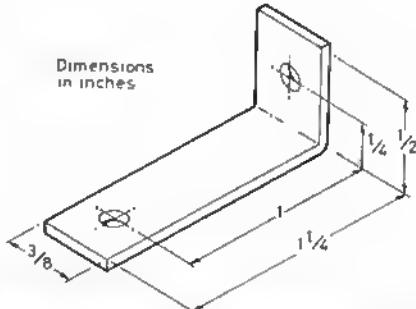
Brackets for fixing fuse panel PCB5. Material: 18swg aluminium or as available. Holes are 6BA clearance
